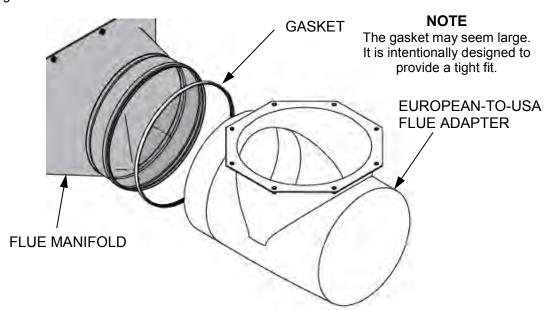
Assembly of USA-to-European Flue Adaptor to Flue Manifold
